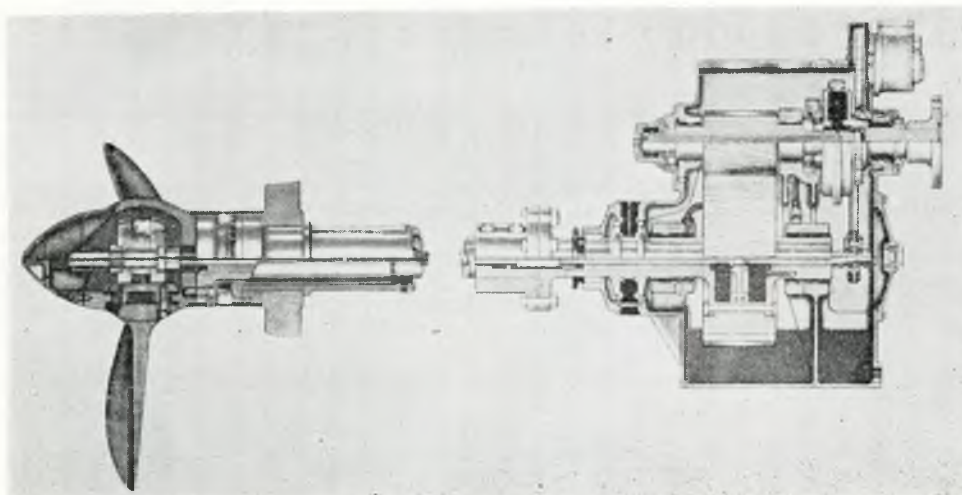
C.P. propeller drive via an isolating clutch and plain reduction gearbox
